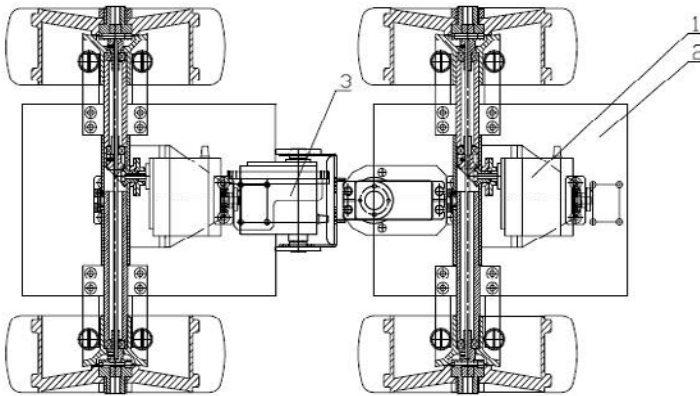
Basic components of the robot: 1. – driving motor (module contains bevel gears), 2. – base of the segment, 3. – bending motor of the joint
